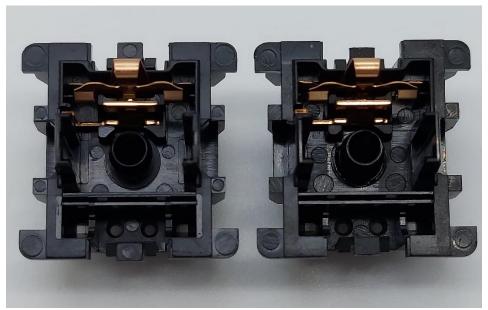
Bottom housing mold markings of Opblacks (Left) and H1s (Right).
